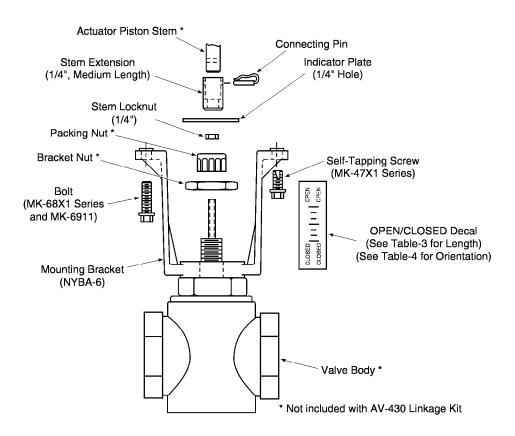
Assembly of MK-4700 and MK-6800 Series Actuators with VB-202, -212, -252, -304, -804, -807, -817, and VB-9323 (1-1/2" to 2") Series Valve Bodies.
